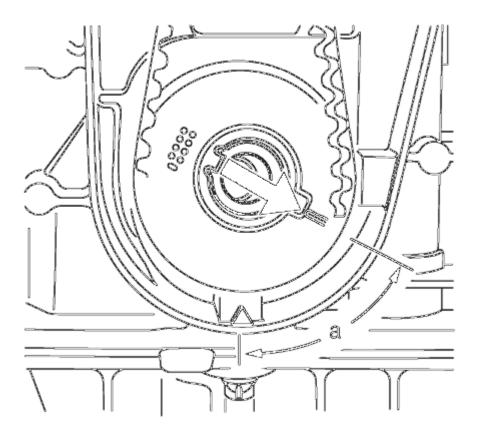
Turning Crankshaft Against Direction Of Engine Rotation Courtesy of GENERAL MOTORS COMPANY
